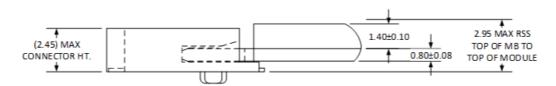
H2.5-S3 - Stack-up Top Mount Single-sided Module for 1.5 Maximum Top-side Component Height and with Higher Clearance above Motherboard
